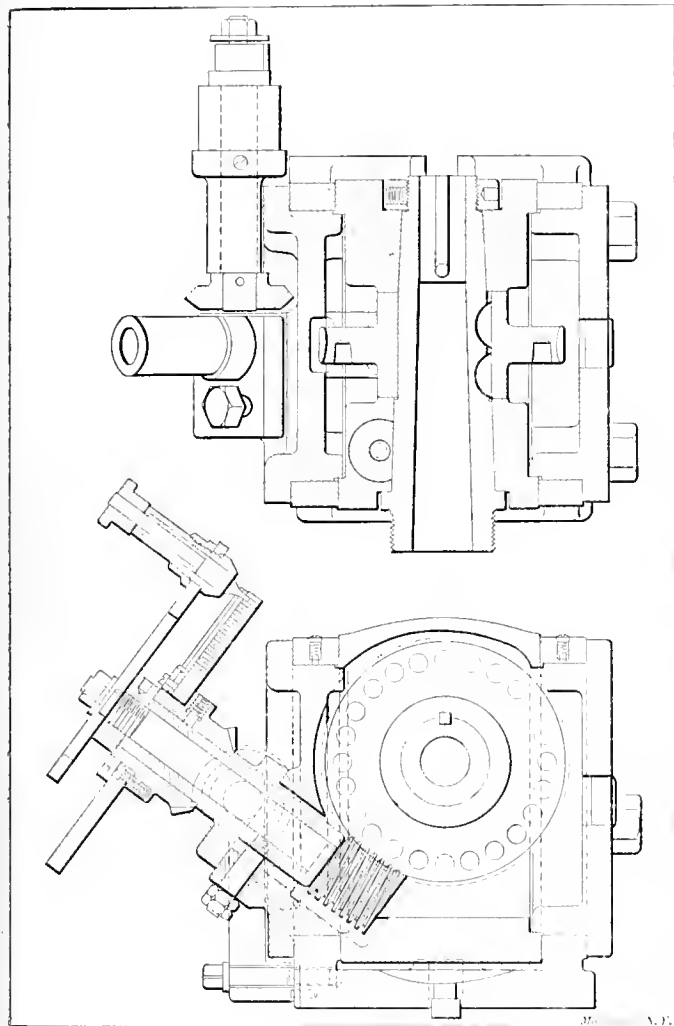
Horizontal and Vertical Sections of Dividing Head
